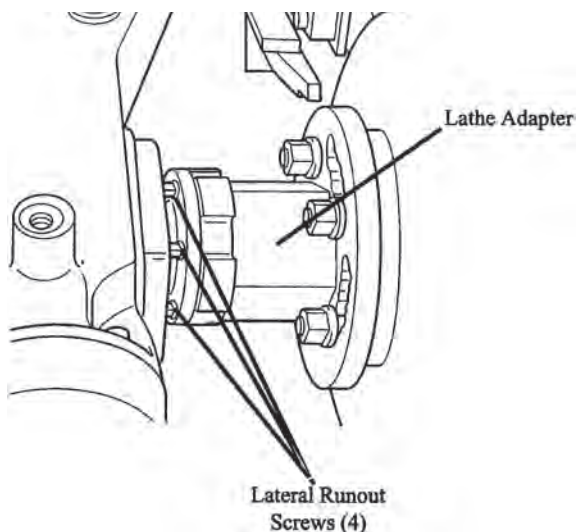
This view shows the brake lathe being fitted to the adapter.
